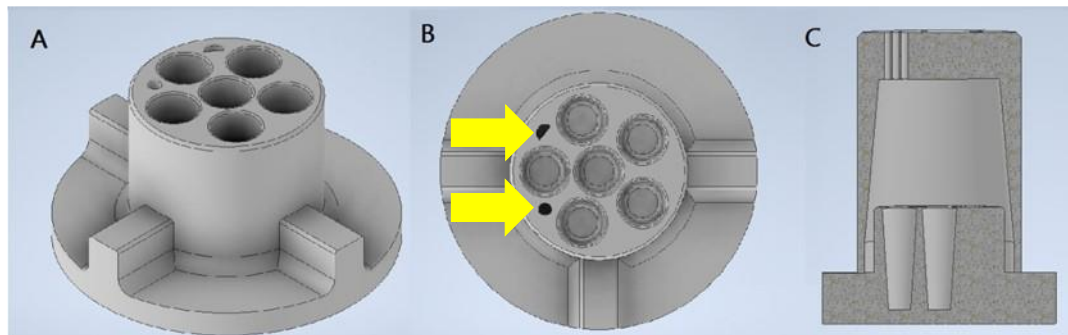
A - isometric view of the specimen holder base B- top view of the specimen holder base, indicator cutouts are shown (yellow arrows) C - section view of specimen holder with lid showing tapered inside and depth of limb cutouts.
